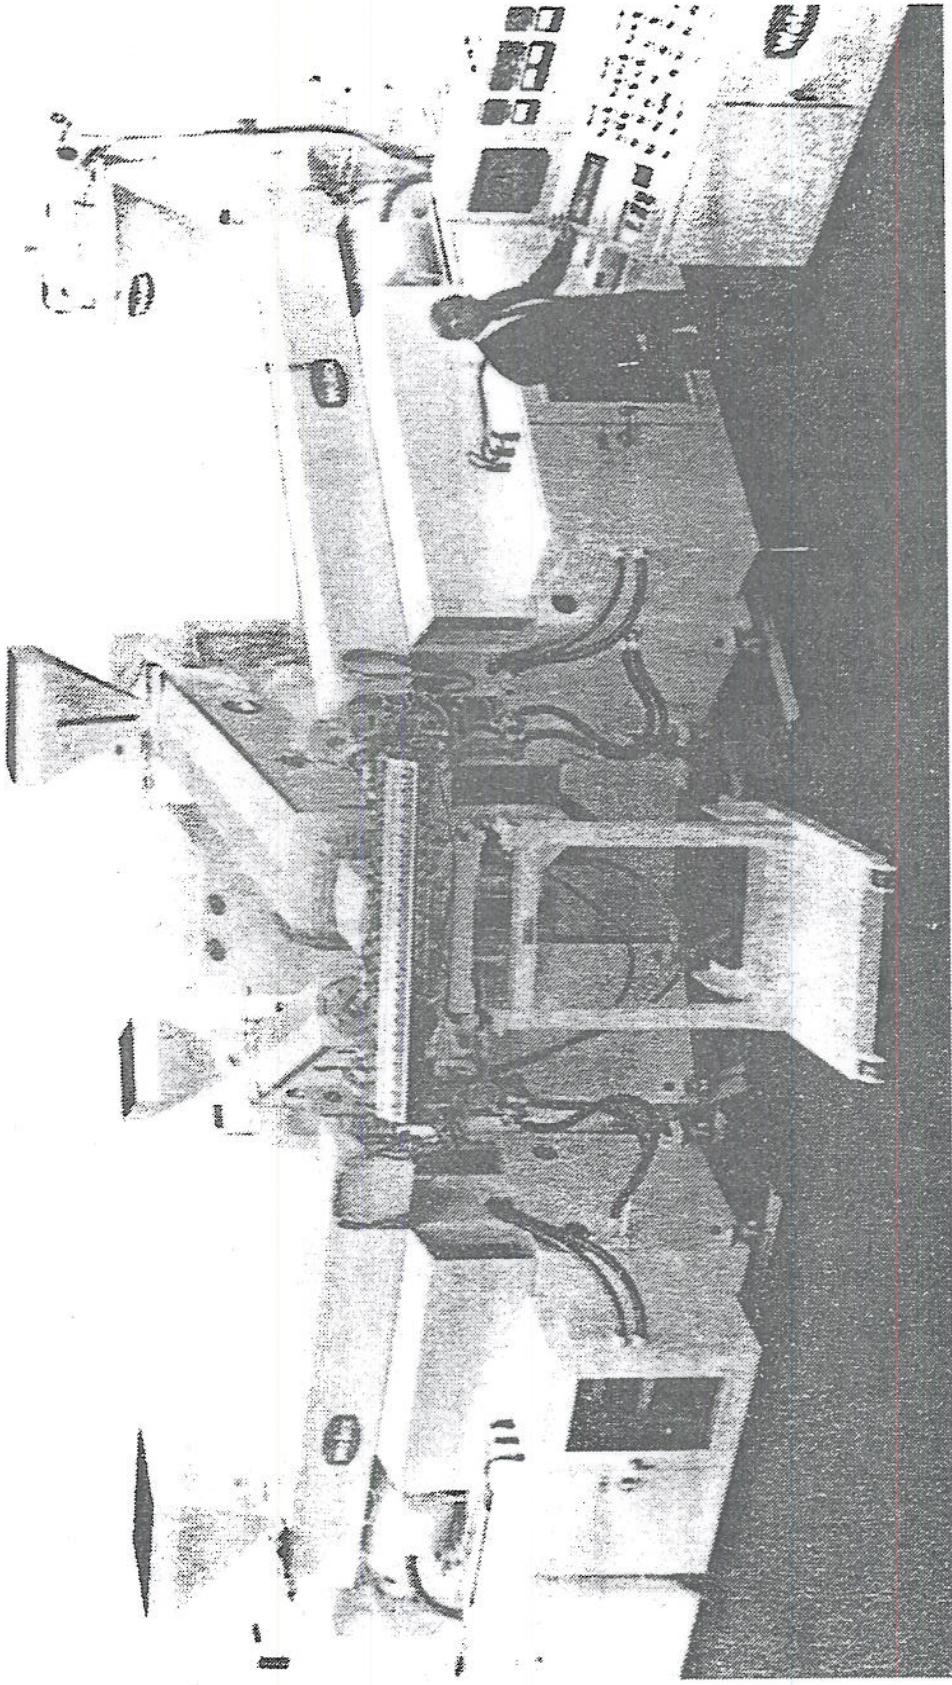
• Large sheet coextrusion set-up (one 6 in., two 3.5 in. and one 2.5 in. extruders; 5 or 150 mm wide die) [WELEX]
